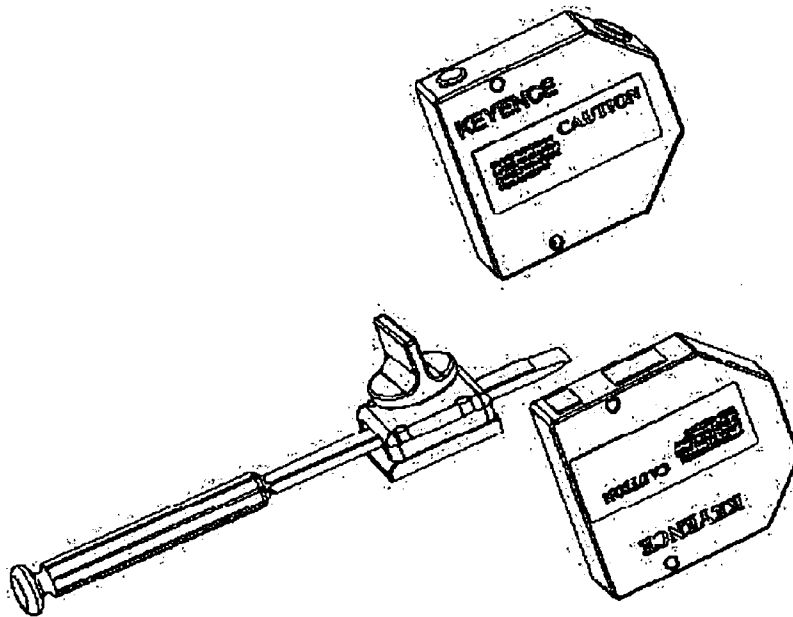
Proposed layout of Laser heads relative to blade clamp device
